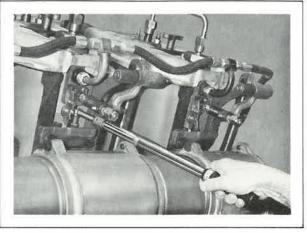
TIGHTENING INJECTION PUMP MOUNTING BOLTS.
